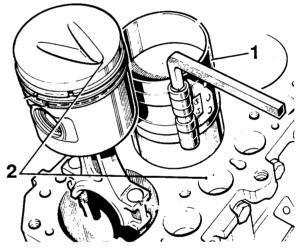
Fitting piston and connecting rod assembly. 1 Tool MS 38U3
